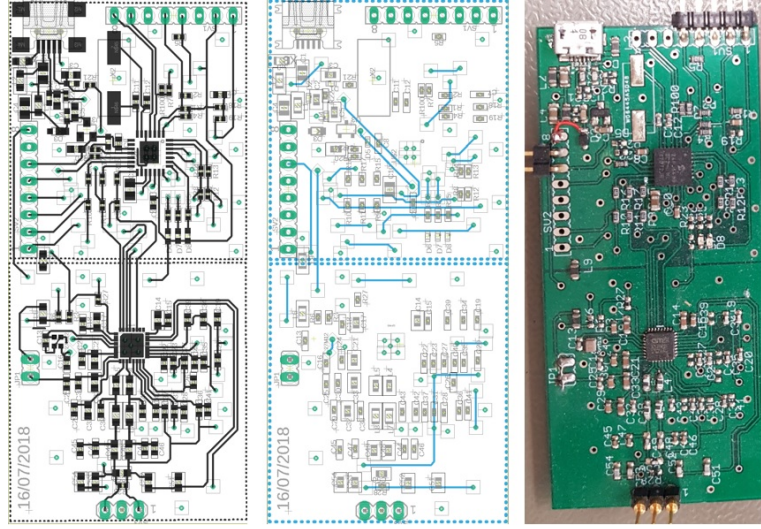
Compact NFC circuit layout showing top, bottom layers, and a picture of the PCB board.
